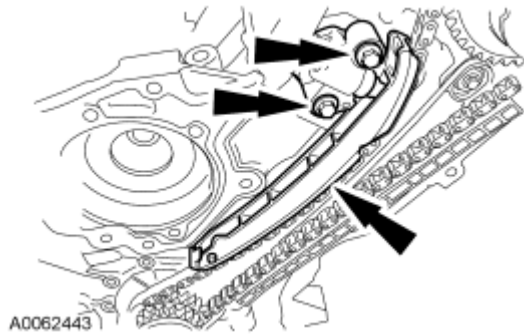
Identifying LH Timing Chain Tensioner & Tensioner Arm
